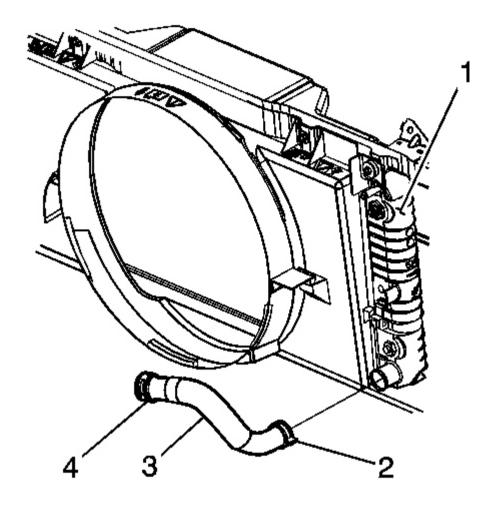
Radiator Hose & Radiator (Outlet) Courtesy of GENERAL MOTORS CORP.
